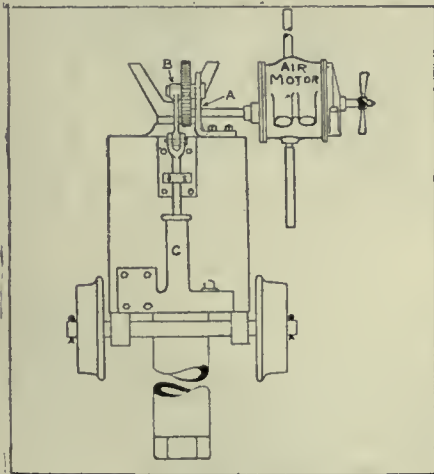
AIR OPERATED HYDRAULIC DROP PIT JACK.
